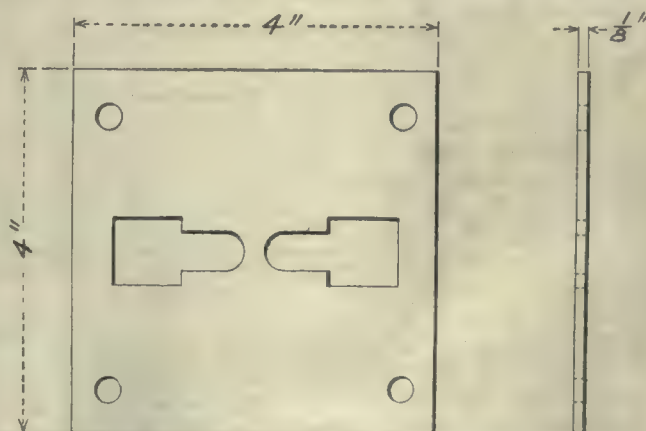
PLATE FOR FACE OF TRIMMING DIE
